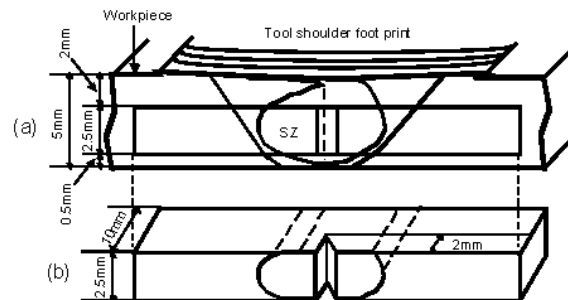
Schematic drawings of Charpy impact test specimen, (a)location at workpiece and (b)geometry (2mm V-notch)
